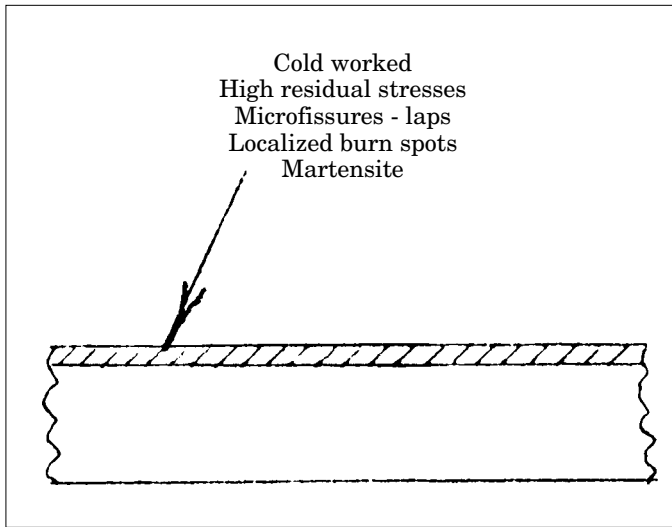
B. Smearing surface layer produced by light grinding, machining or glass bead blasting.
